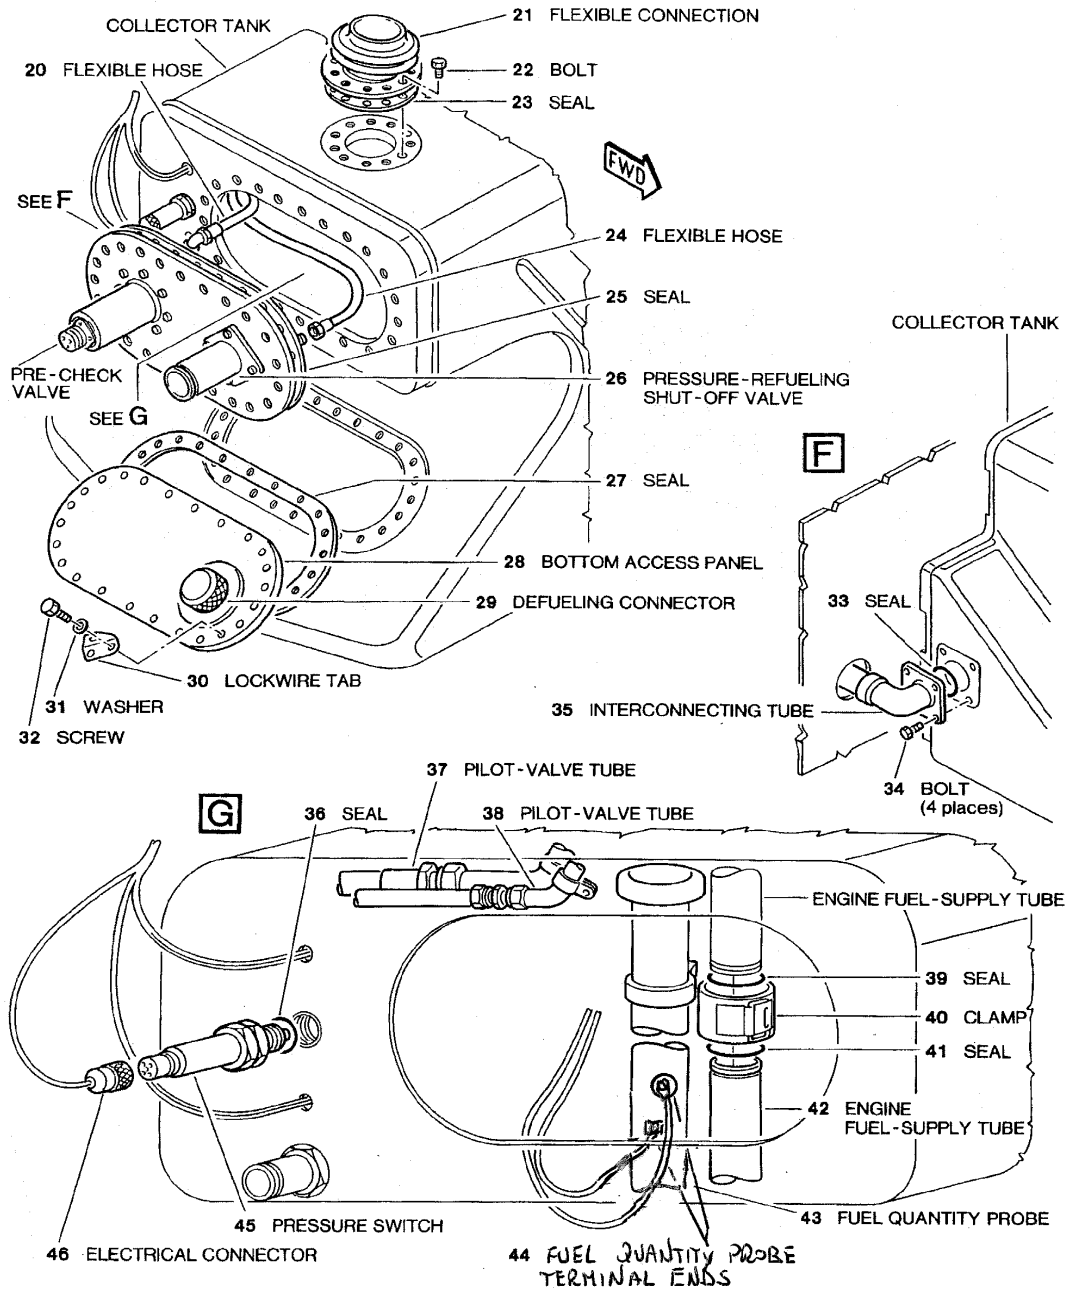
(Sheet 2) RH Fuel Collector Tank - Removal/Installation
